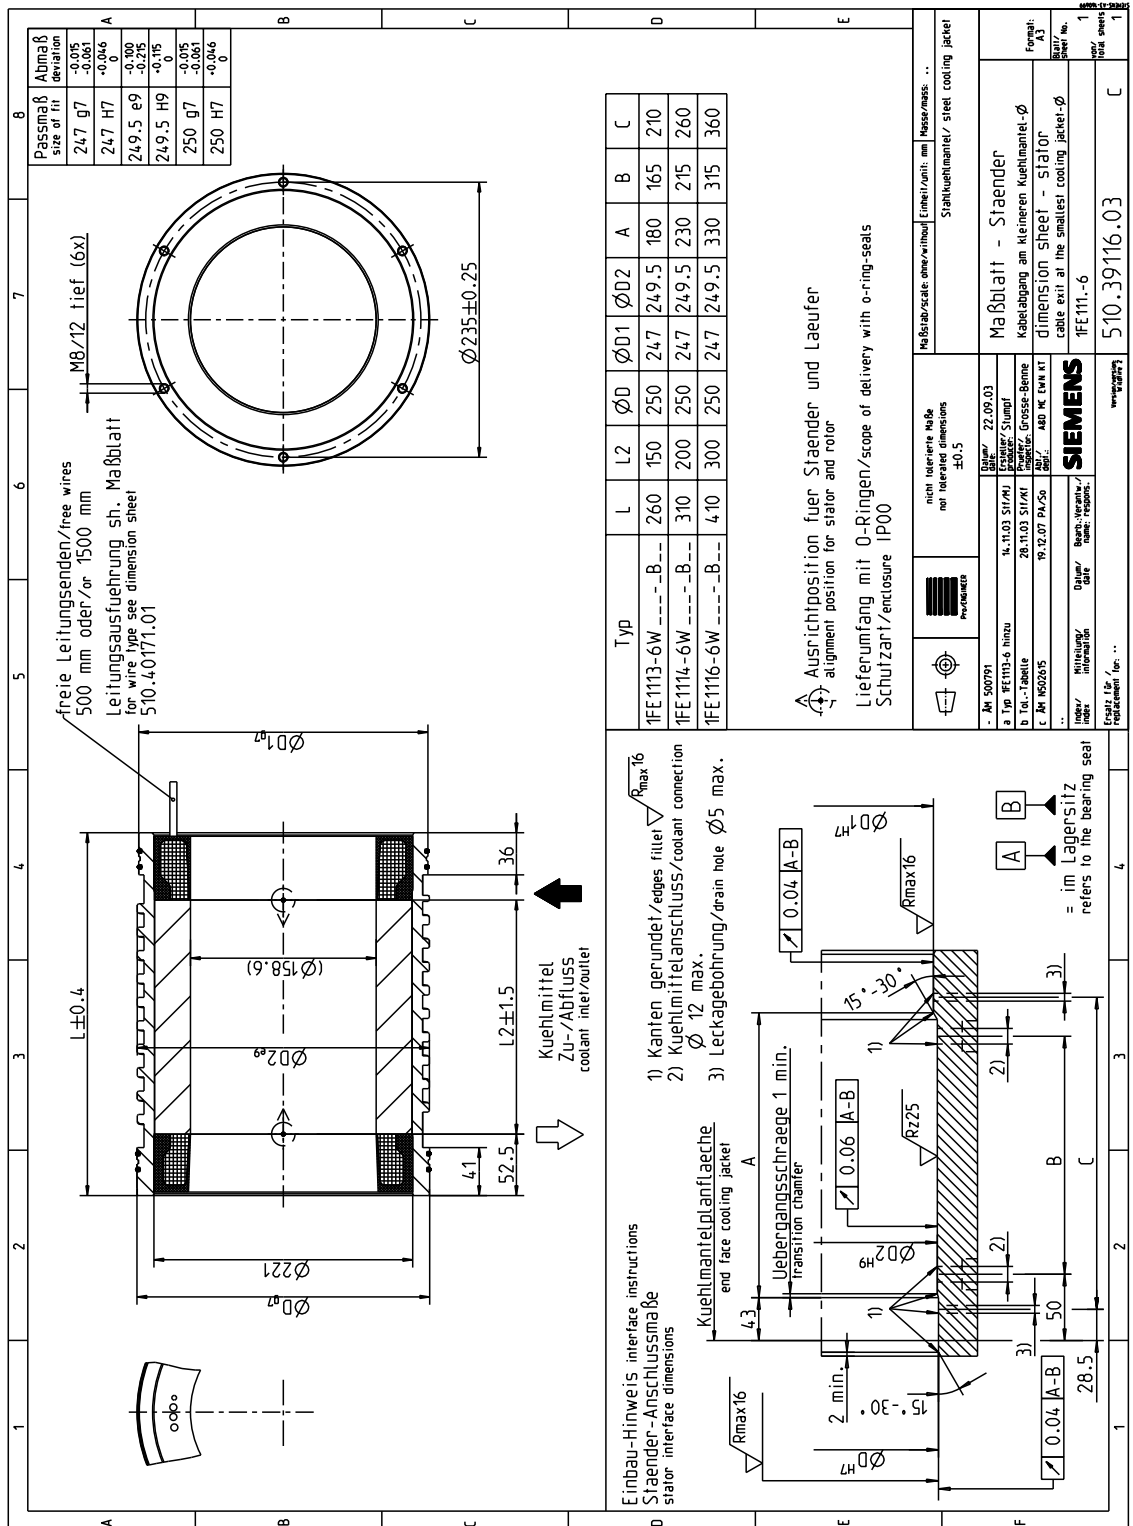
1FE111-6, stator with cooling jacket, cable outlet at the smaller cooling jacket diameter
